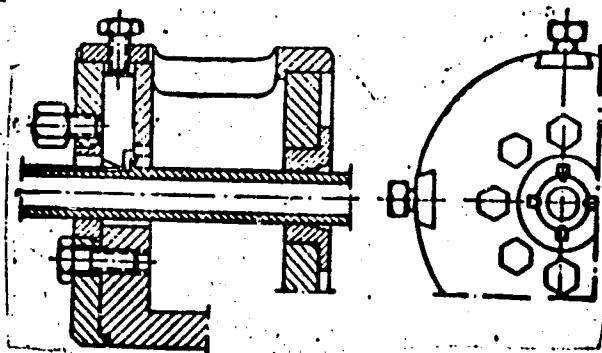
Yoke for drawing longitudinal channels on the outer surface of pipes.
